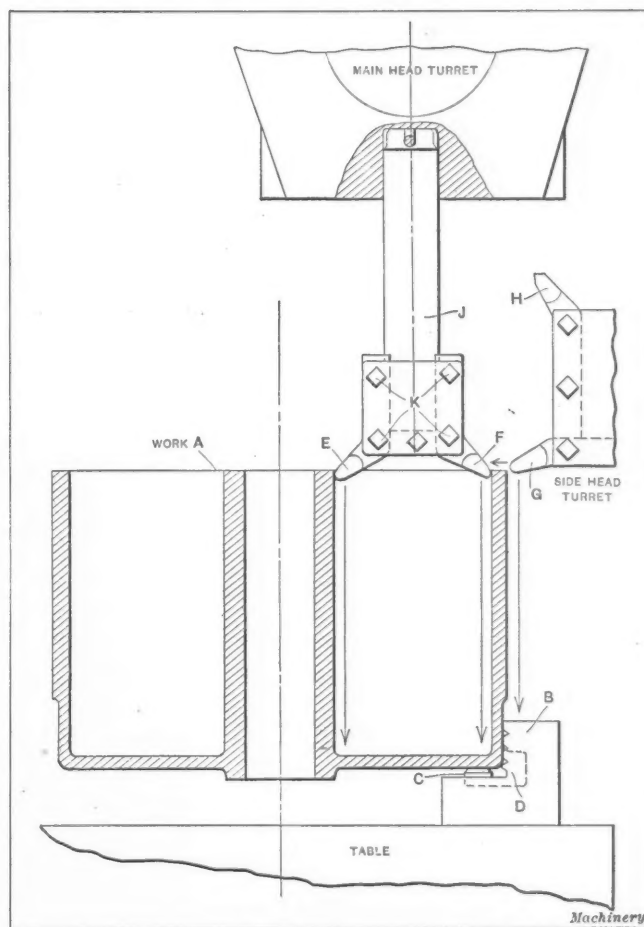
Another Thin Casting machined in the Vertical Turret Lathe
